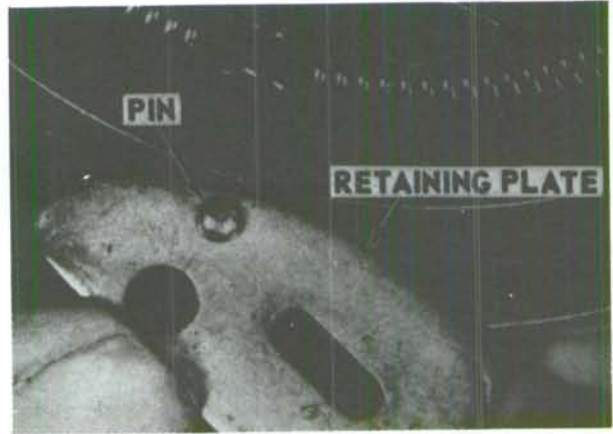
Flywheel may be locked in place on SP60, SP80, SP81, PM700 and PM850 Models by inserting $\frac{1}{4}$ inch locking pin through base plate into notch in flywheel.
